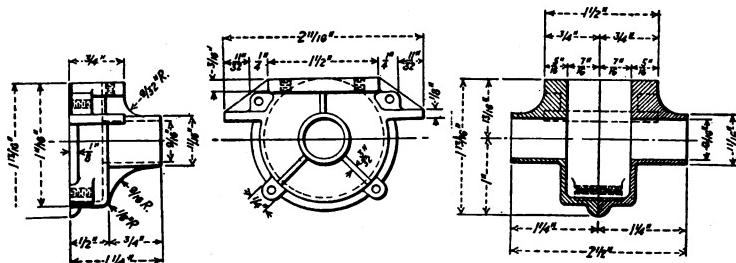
Drawing of a crankcase to be machined and finished on the lathe as described in the text
